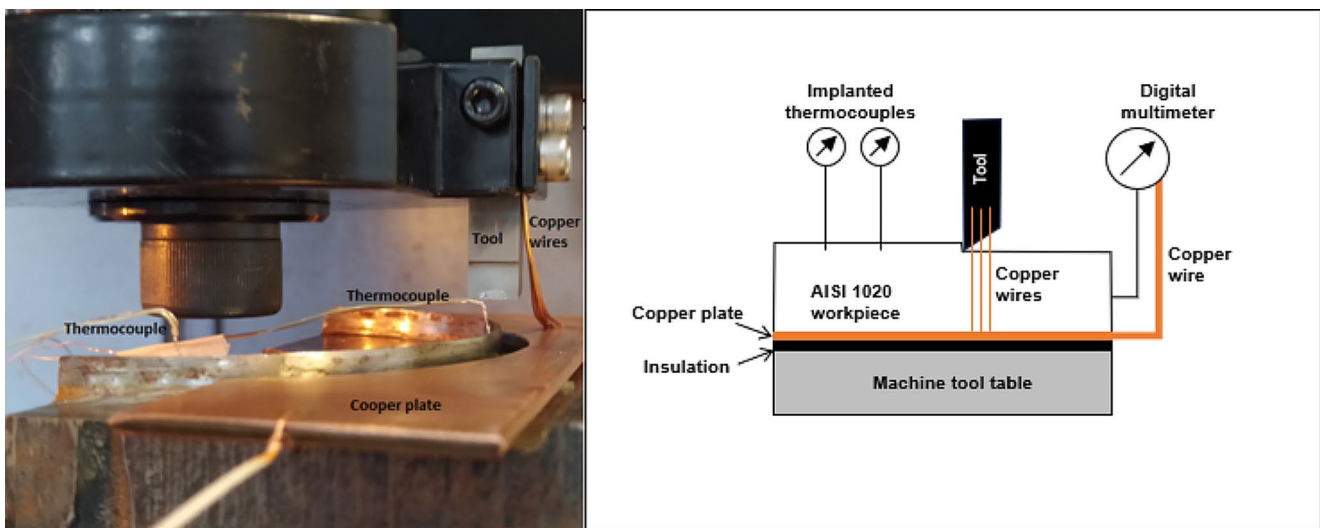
Experimental setup for chip temperature measurement during orthogonal cutting
